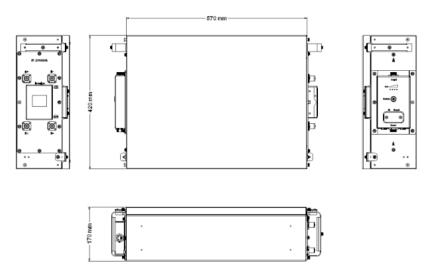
Hybrid Inverter (LXP-5K hybrid) Appearance & Dimension Drawing
